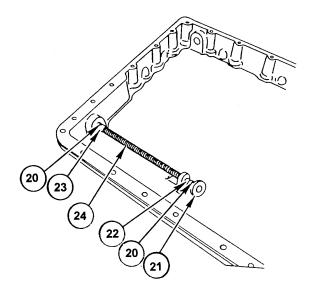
Push Rod Components. REPLACE PUSH ROD COMPONENTS – CONT.
